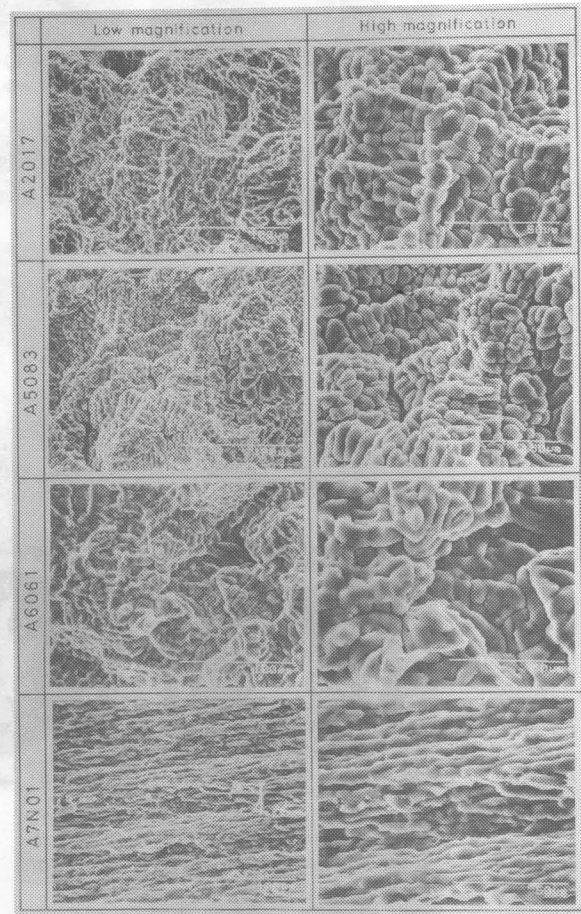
Typical fractographs of solidification crack occurred in GTAW crater.
